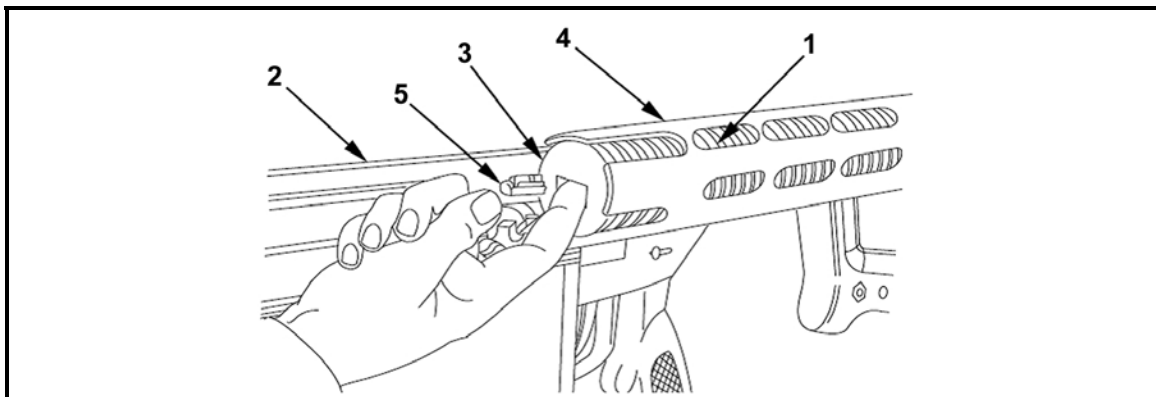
Turning the buffer to align the groove in its flange with the buffer stop.
